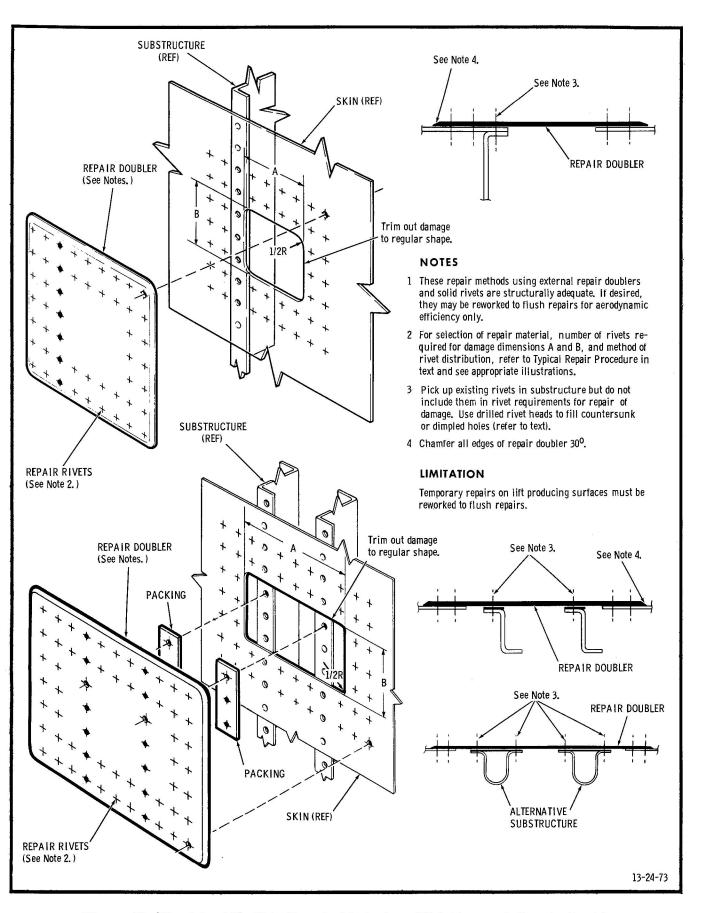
(Sheet 1 of 2) Skin Repair Methods - With External Repair Doubler
